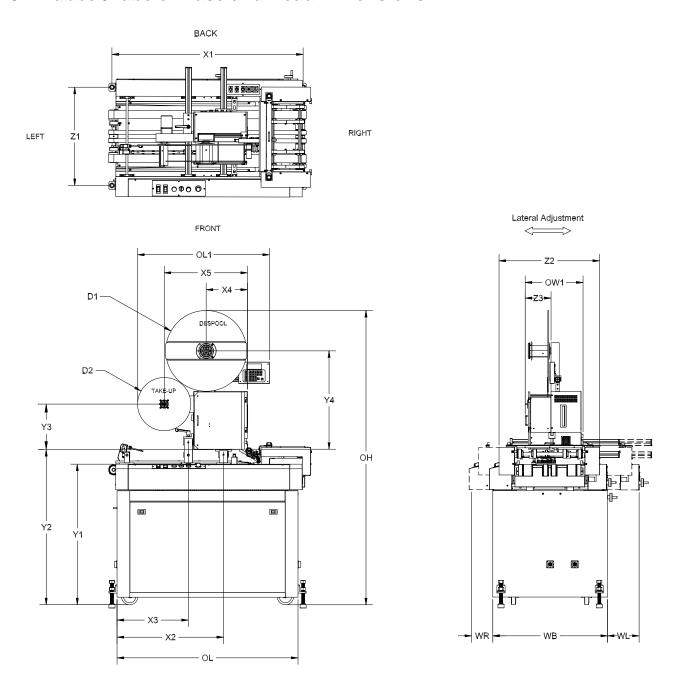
Tabber/Labeler Base and Head dimensions*.
